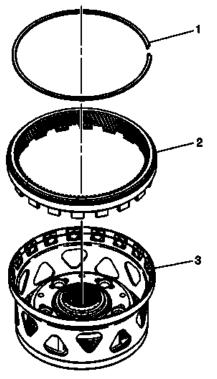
View Of Reaction Carrier Assembly & Components Courtesy of GENERAL MOTORS COMPANY
